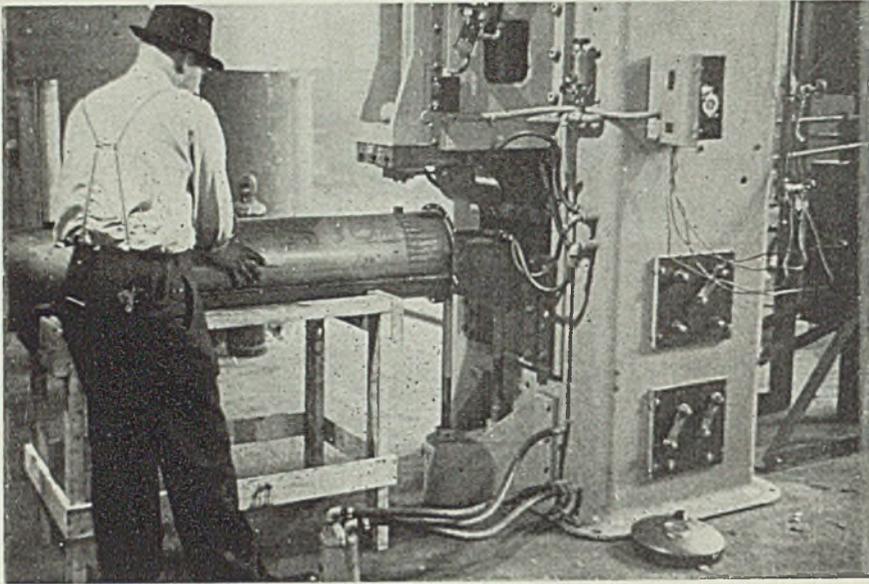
Spud welder which fastens threaded male outlets to tank body
